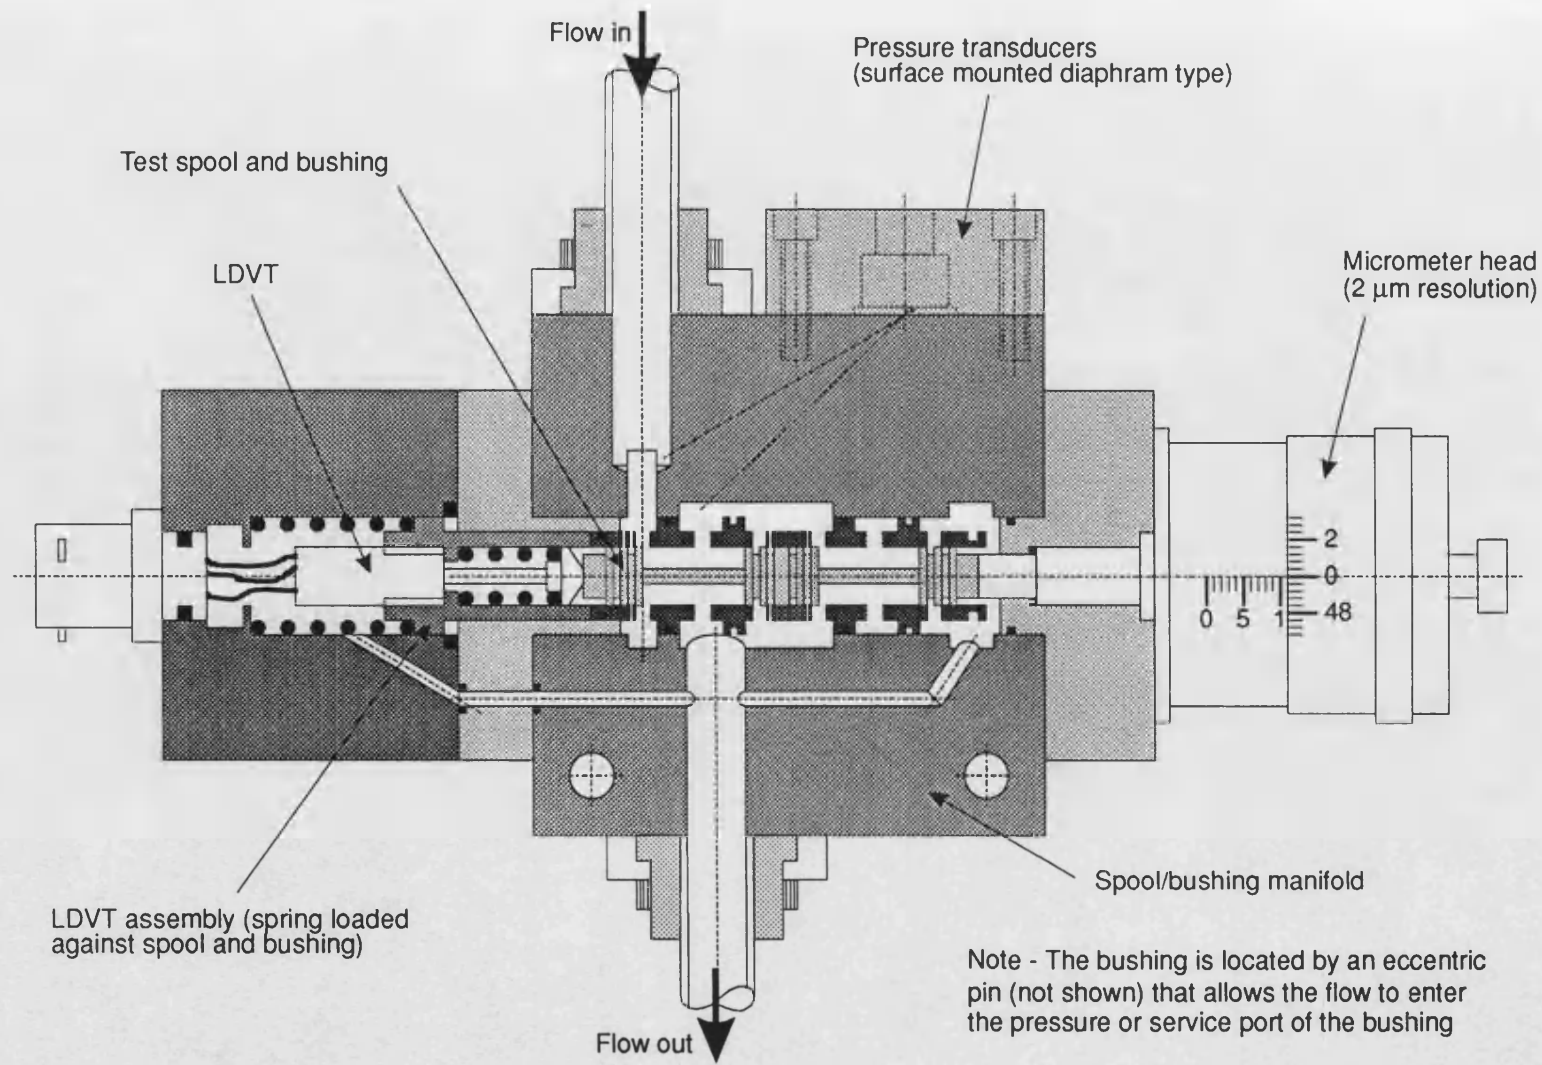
Cross sectional view of spool/bushing valve block, flow P to S.
